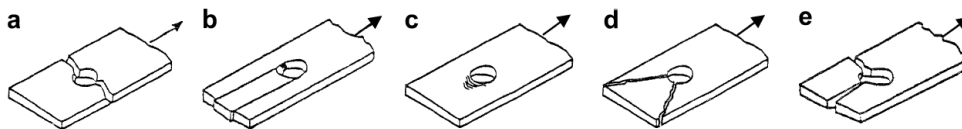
Five typical damage modes observed in bolted composite joints: (a) net-section tension, (b) shear-out, (c) bearing, (d) tear-out and (e) cleavage.
